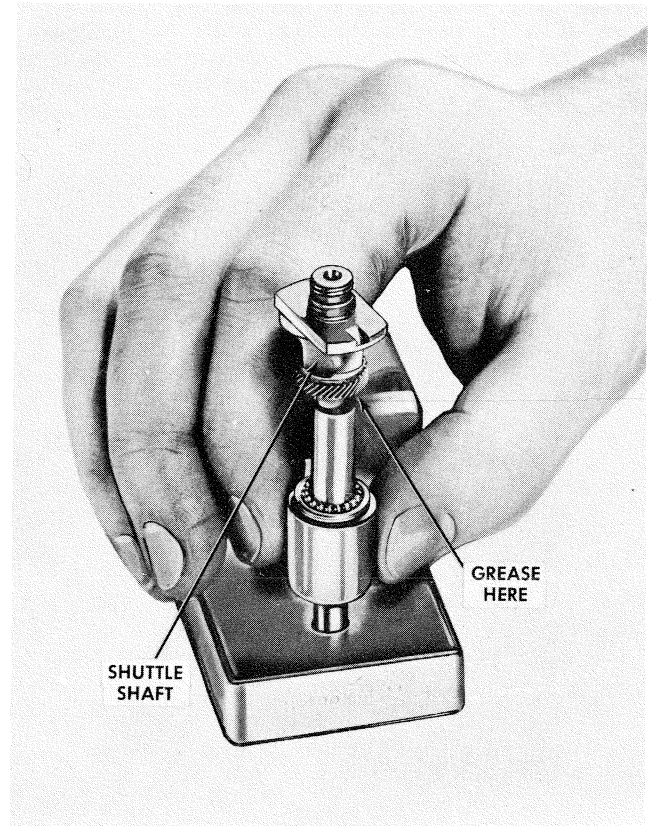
Reassembly of Counter Gear and Shuttle Shaft
